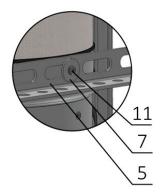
Suspension ring and mounting rail connected by screw or rivet
